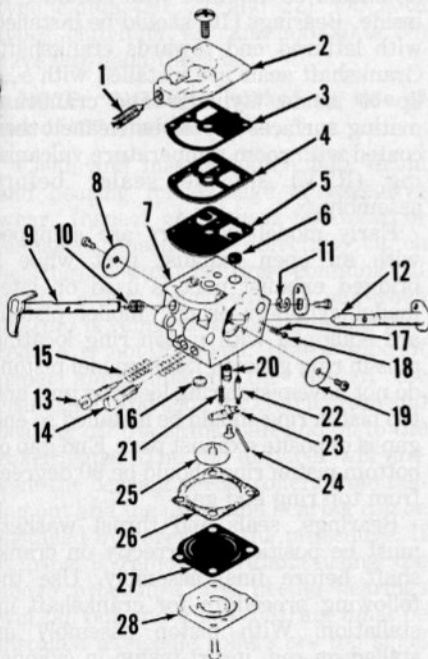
Exploded view of Zama C-1S-H4 carburetor. Zama C-1S-H8 carburetor is similar.
